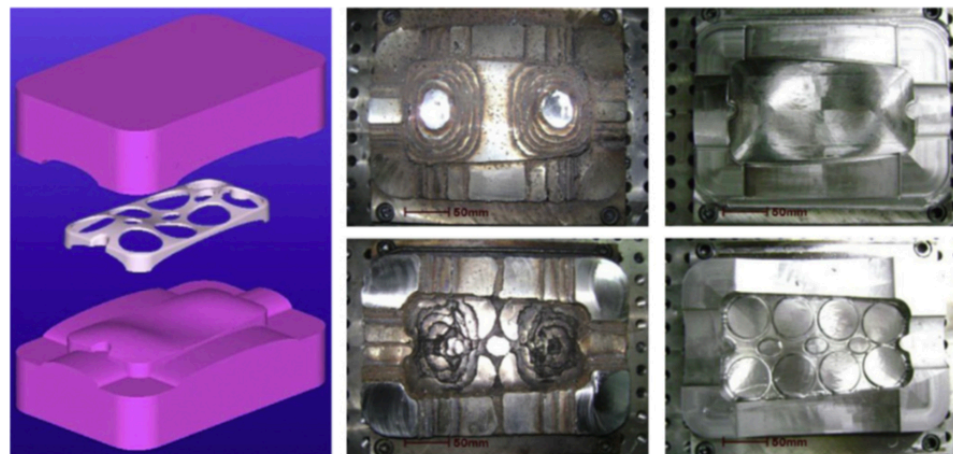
Injection molding tooling produced by 3-axis Hybrid Layered Manufacturing (Gas Metal Arc Welding plus CNC machining): CAD model (left), near net shape molds (center), and finished molds (right) [317].
